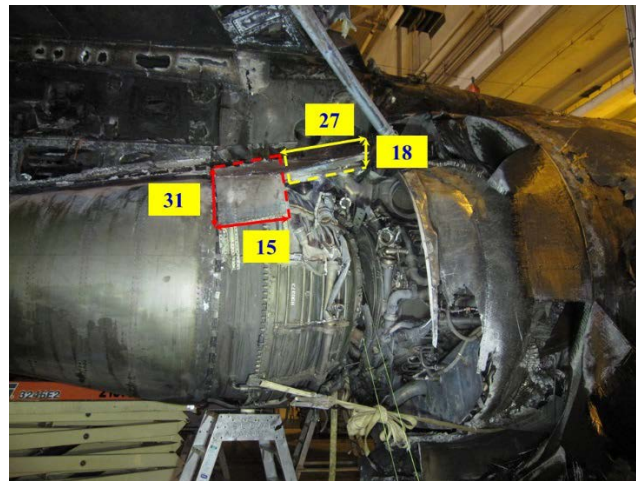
OUTBOARD CORE COWL DAMAGE
